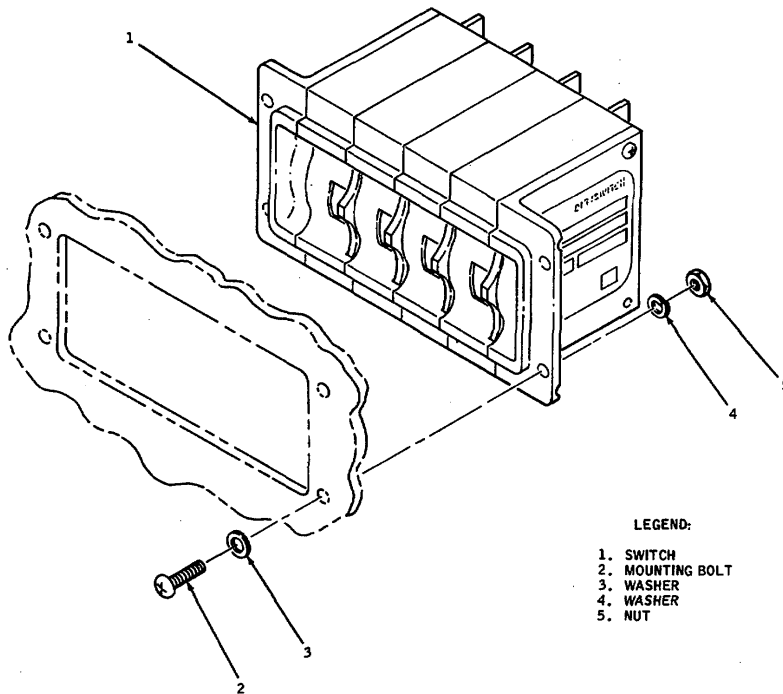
Thumbwheel Switch, Removal and Replacement
